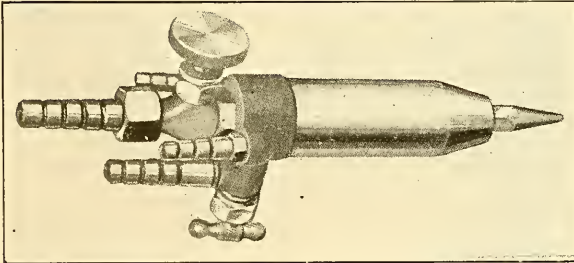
Oxweld Type W-8 Single-Jet Water-Cooled Welding Torch.
